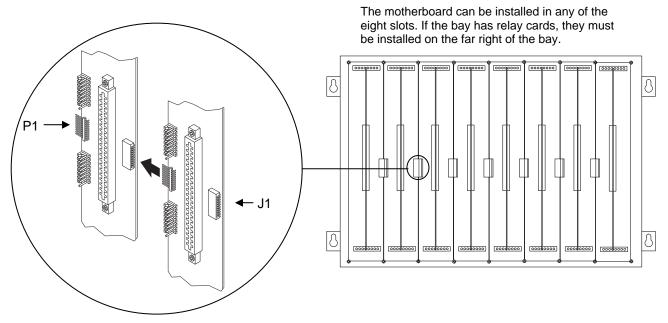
Installing the Motherboard into a 4100 Expansion Bay
